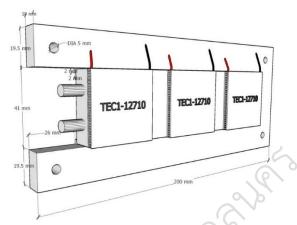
Shown the TEC1-12710 3 modules are installed at water-cooled aluminium mounting plates in TESSAC.
